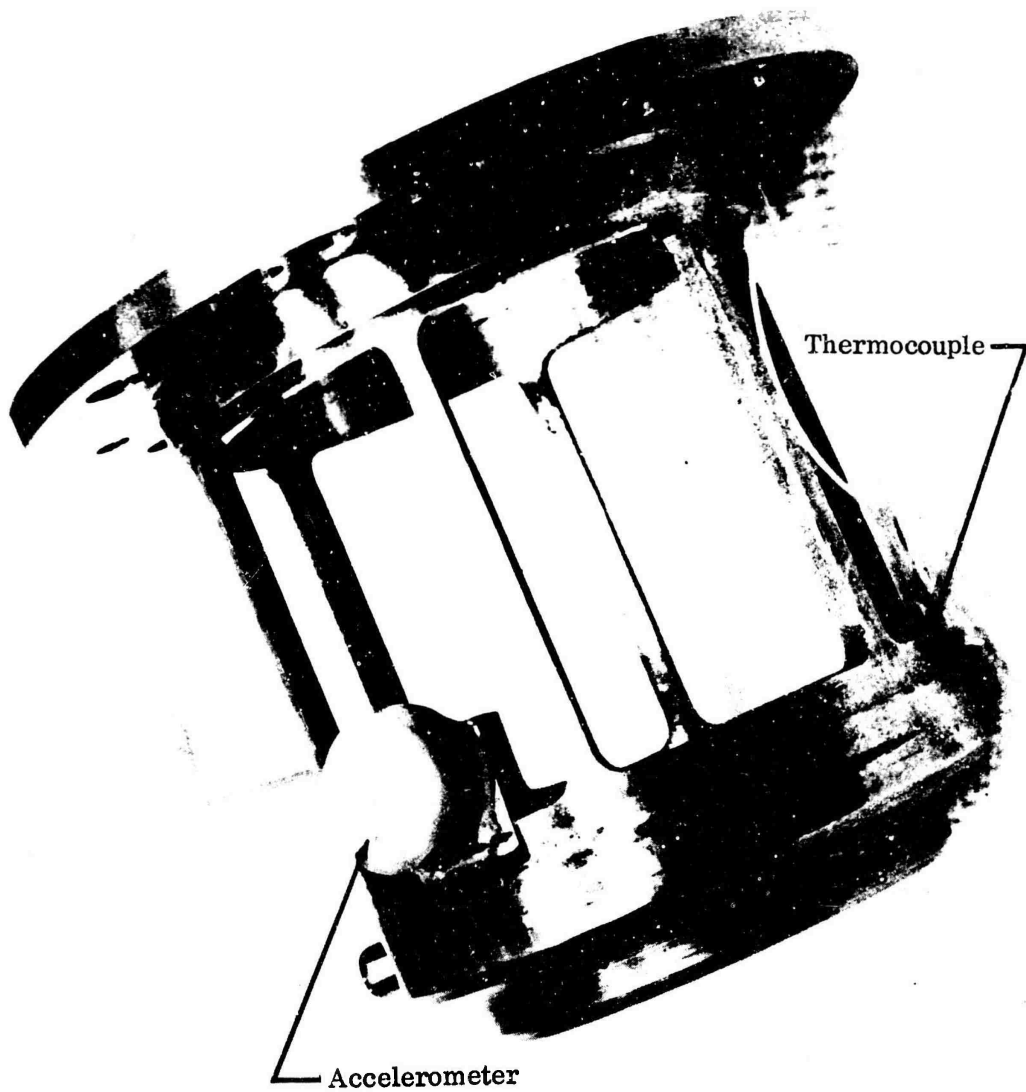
Radial-Bearing-Cage Accelerometer and Thermocouple.
